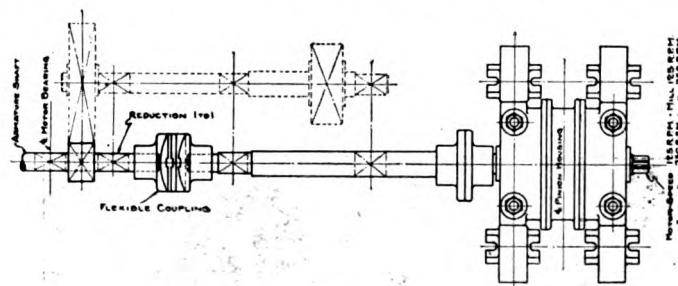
, 3 and 4 show three possible assemblies of the gear reductions between motor and mill. In Fig. 2 the power is transmitted from the armature shaft through the motor pinion and gear to the jack shaft with a reduction of 3.1 to 1. From the jack
